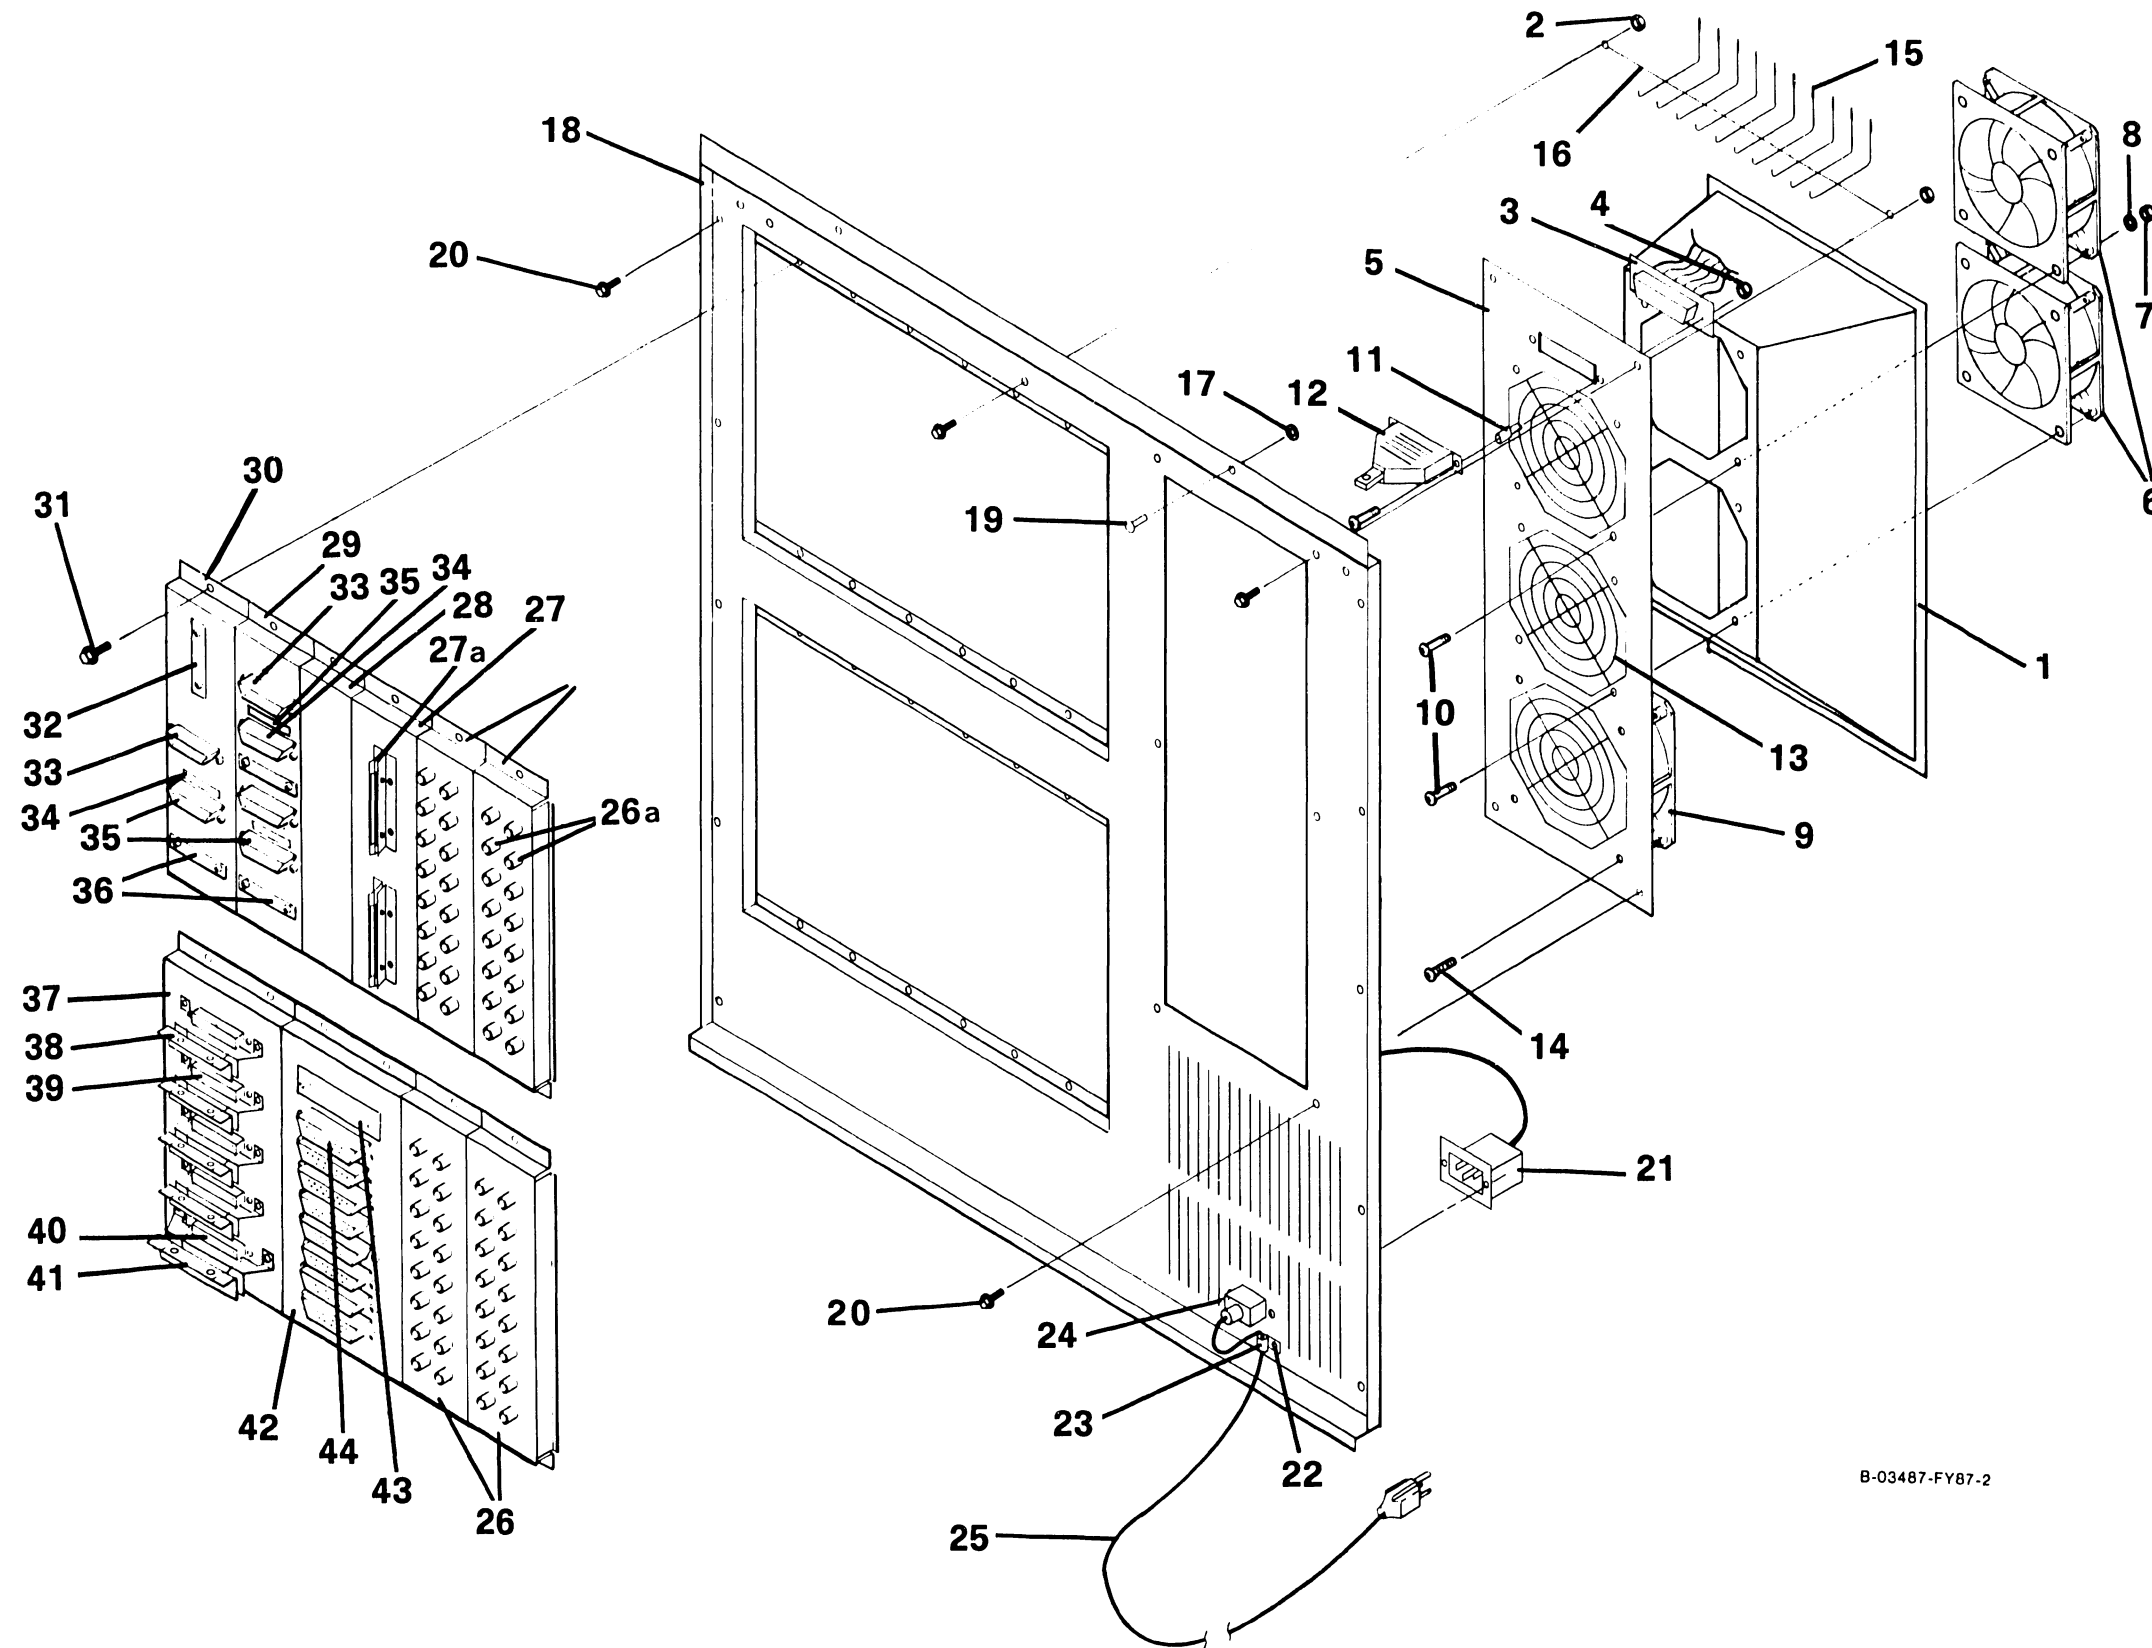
MAINFRAME CARD CAGE ASSEMBLY
